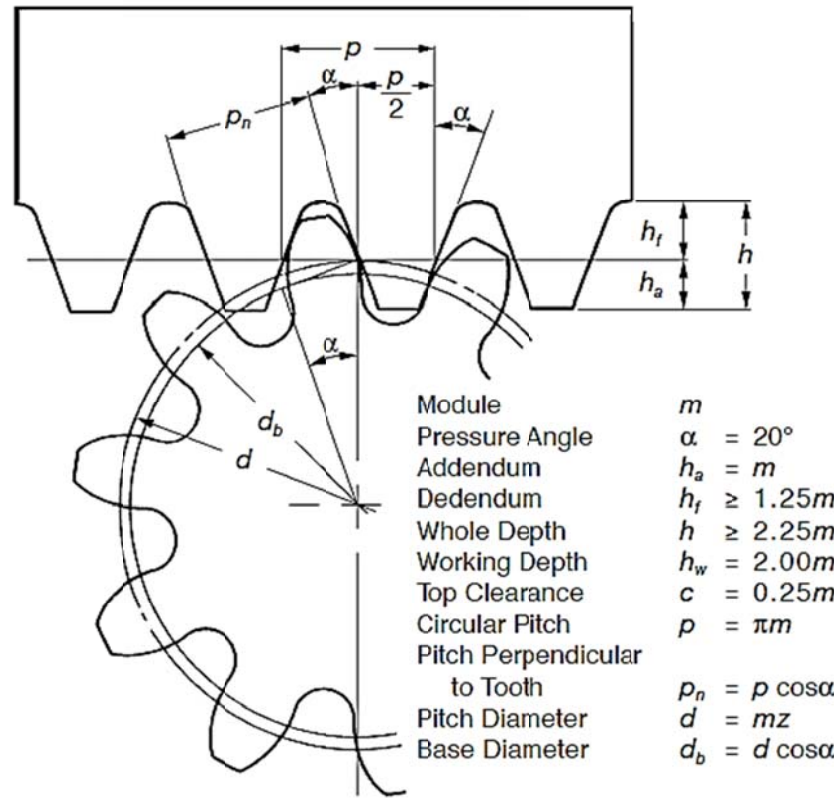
The Tooth Profile and Dimension of Standard Rack
